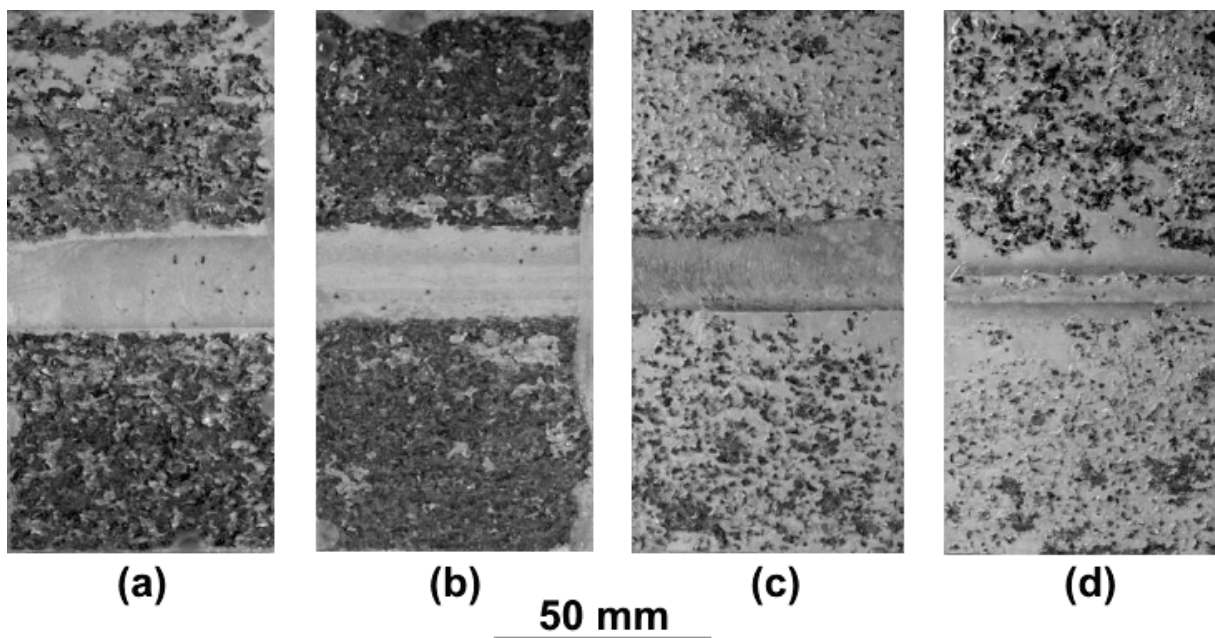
Surface appearance of FSW 6056 joints immersed 96h in the EXCO solution according to ASTM G34-90: a) FSW 6056–T6 face side, b) FSW 6056-T6 root side a) FSW 6056-T7X face side, b) FSW 6056-T7X root side
